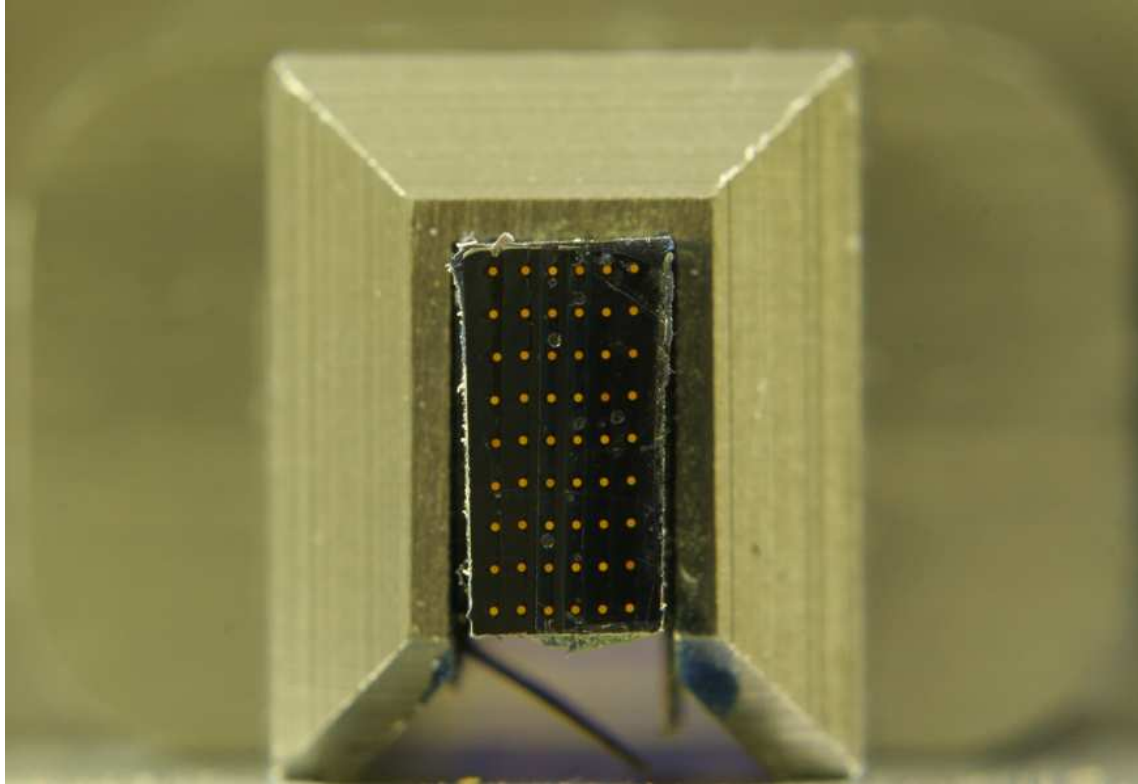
End view of fibers, fiber bundle epoxied into mounting fixture.
